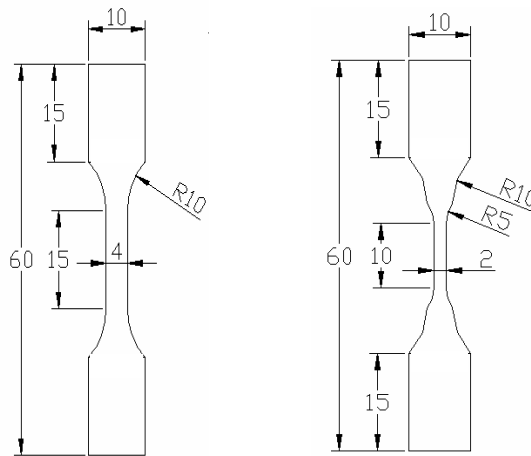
Specimen shape used for fatigue test.(a) Specimen shape (b) New design specimen shape
